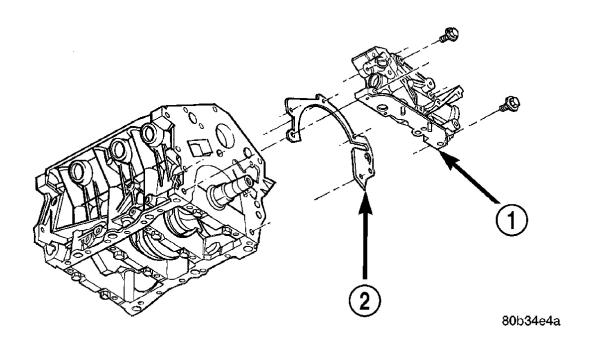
Oil Pump & Gasket Courtesy of CHRYSLER LLC
